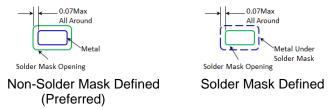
Solder Mask Pattern (Dimensions are in mm)
